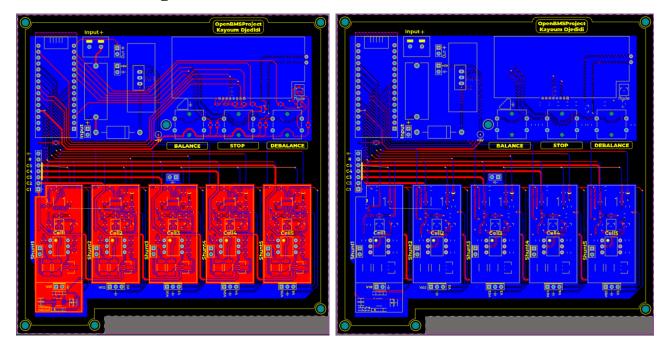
FINAL ASSEMBLY PCB IN 2D TOP VIEW
